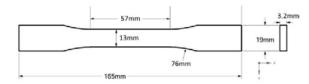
Dimensions of tensile specimen designed according to ASTM D638 Type-I standard.
